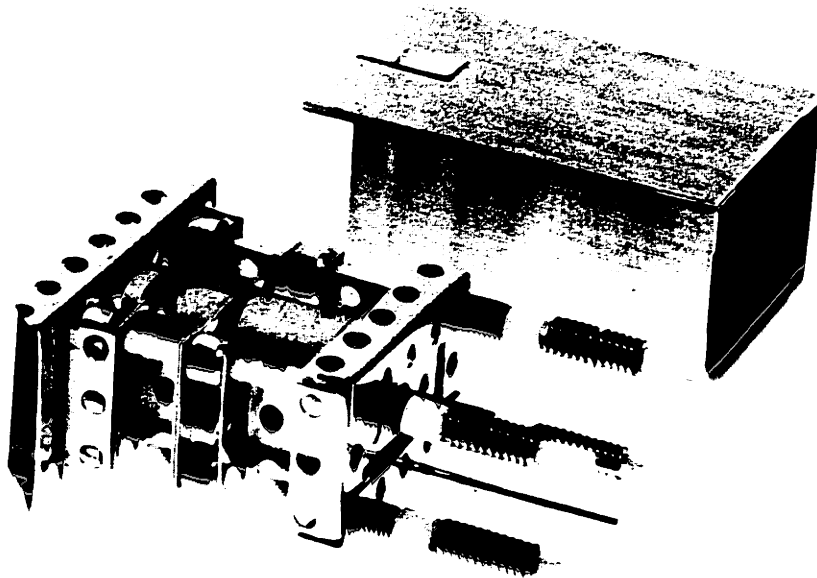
Electron collector assembly. The shield is held on by friction fit.
